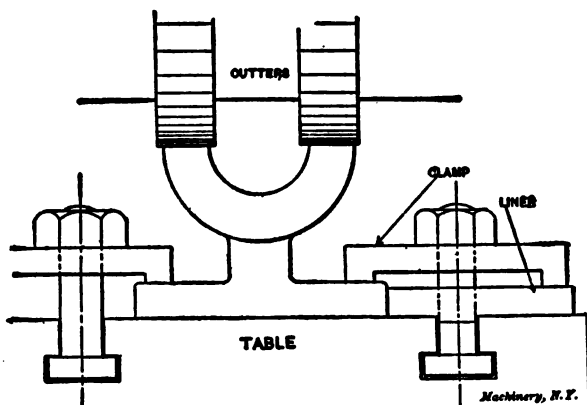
Holding the Base of Bearing while Milling Seat for Cap
